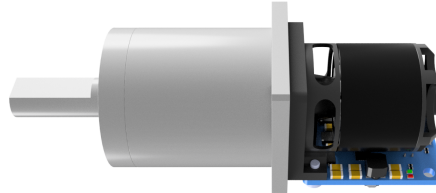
Simplex Motion SE010 with a planetary gearbox, CAD render
